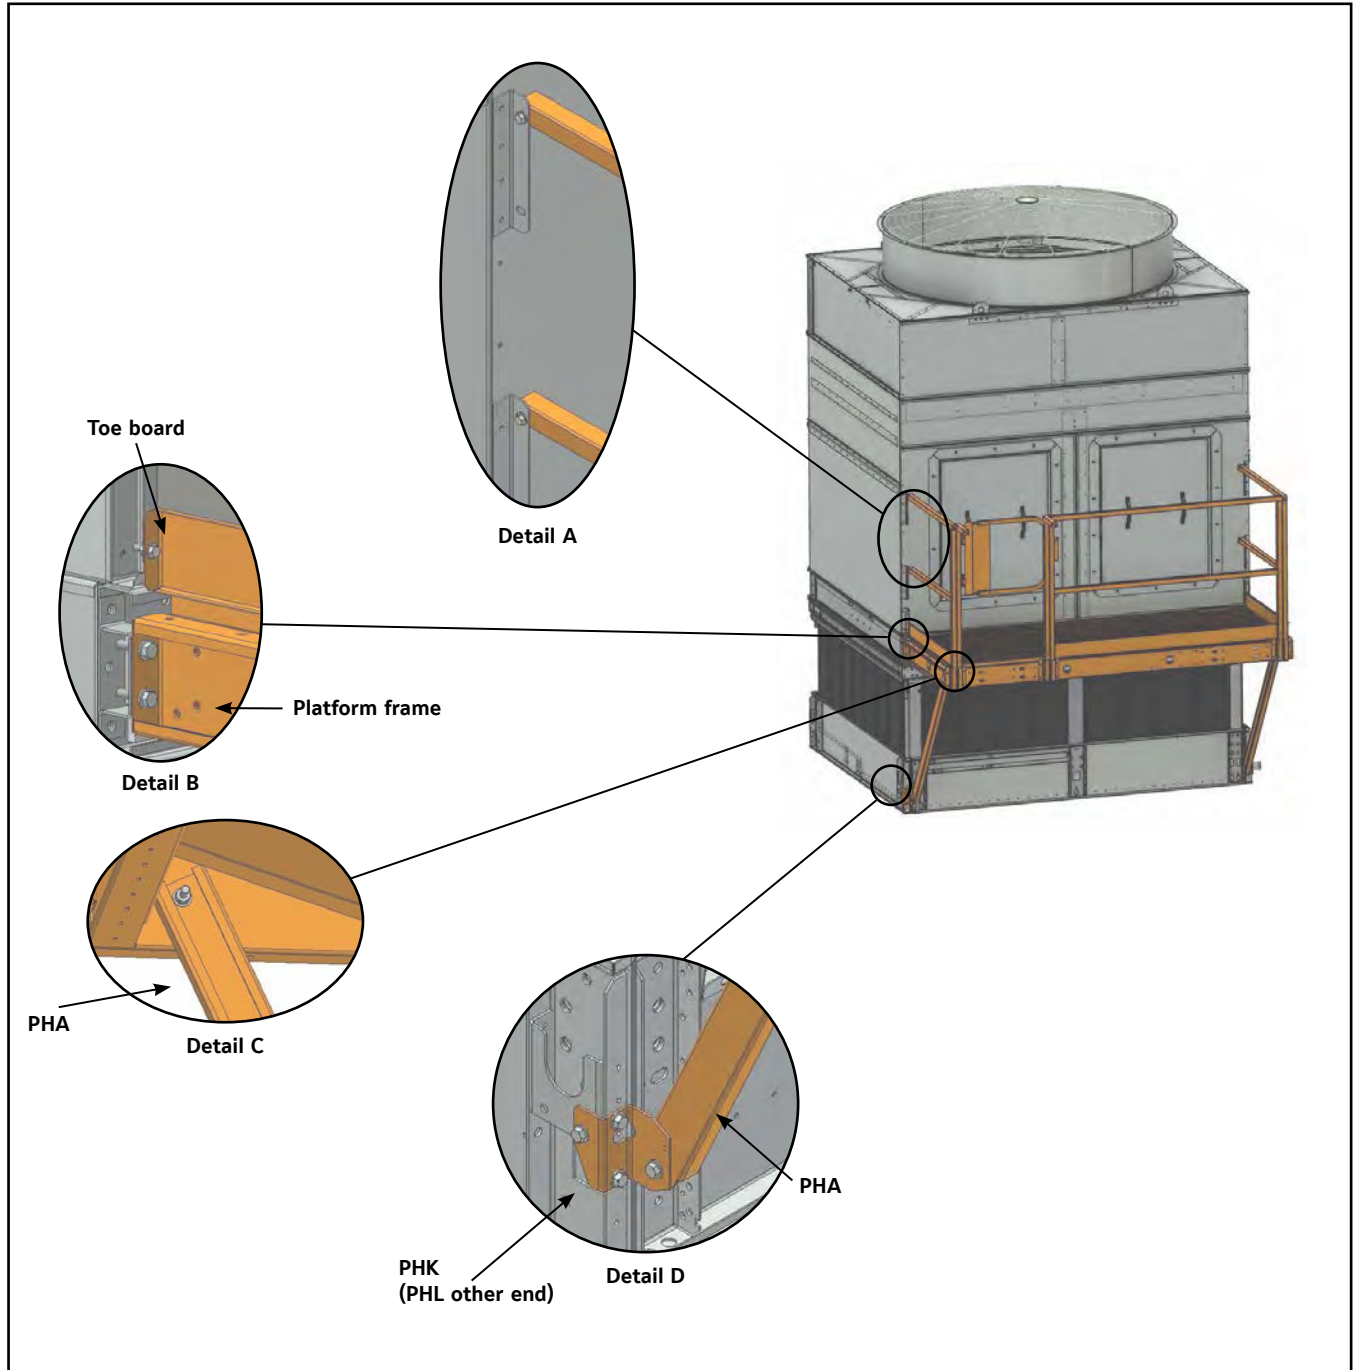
Fill Access Platform with Side Ladder - IDCF-0709, 1012, 2012, 1212, 2412
